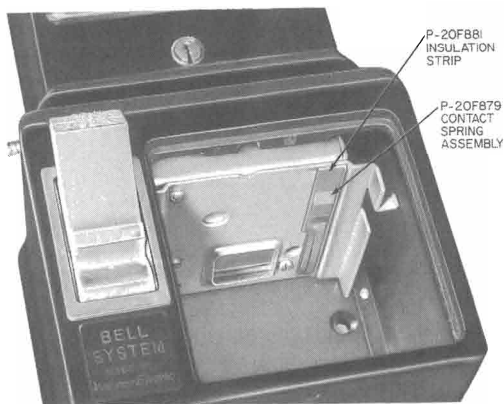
Installation of Insulation Strip and Contact Spring Assembly
